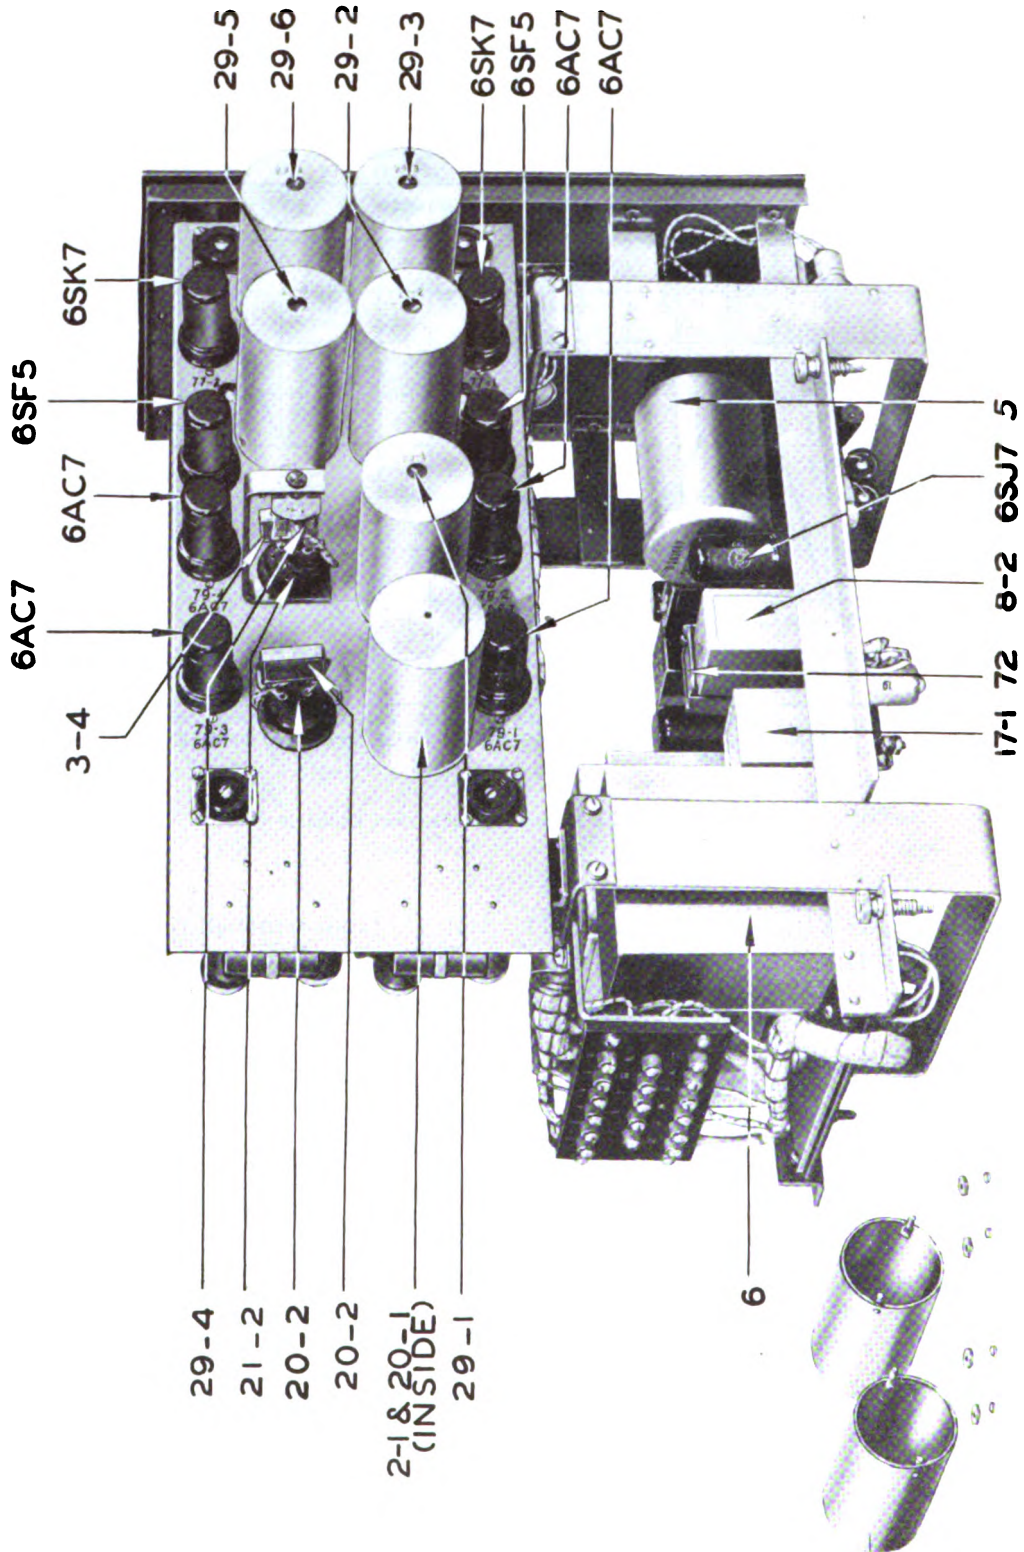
OSCILLATOR-MULTIPLIER UNIT, HINGED CHASSIS RAISED
